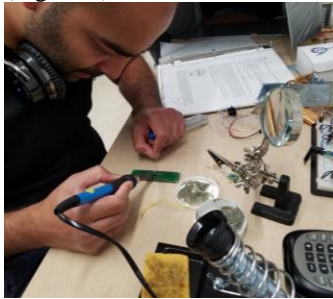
Sensor fabrication conducted by crewmember within the ILMAH EVA and electrical engineering laboratory facilities.
